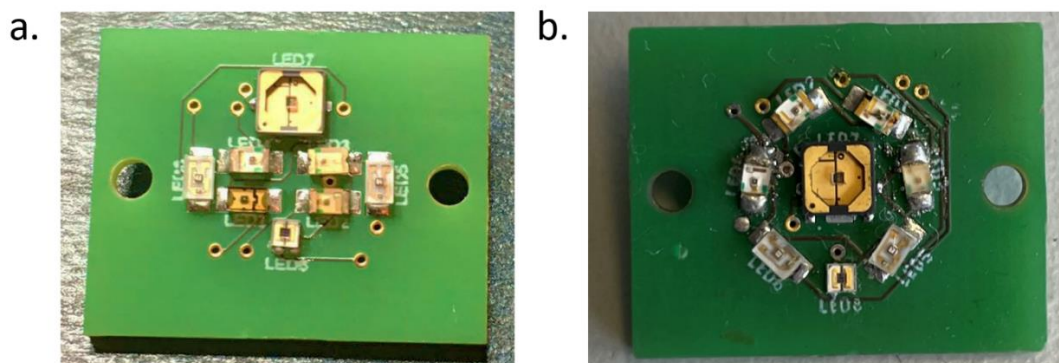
Assembled compact LED array designs. (a) Assembled compact LED array with design concept of placing UV LEDs on the periphery. (b) Assembled compact LED array with design concept of placing smaller LED packages circularly around the largest LED package.
